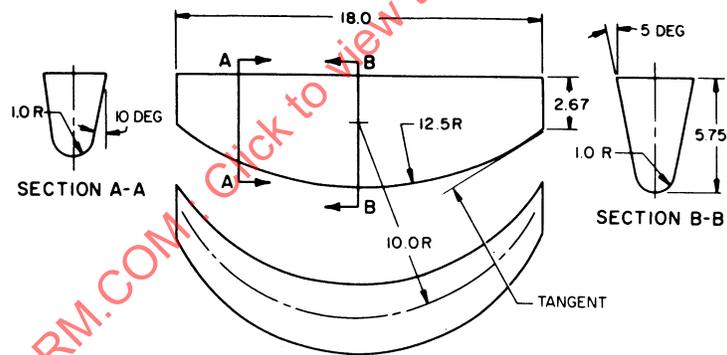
BEAD UNSEATING TEST FIXTURE
